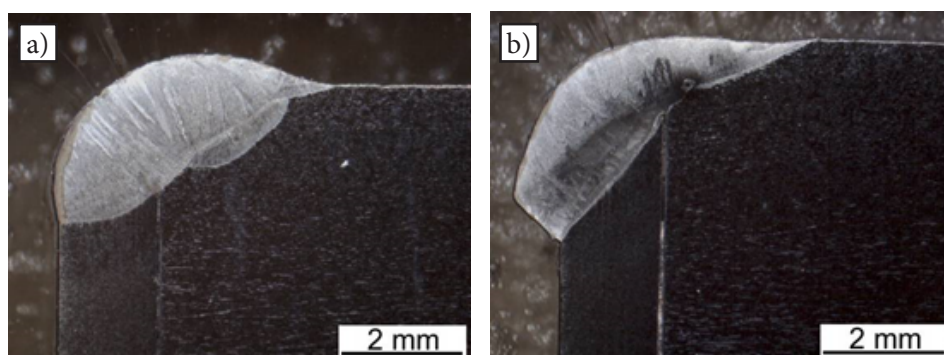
Macrostructure of welded joints: a) multi-run structure, b) weld overlap (improper shape); the joints were subjected to microscopic examinations
